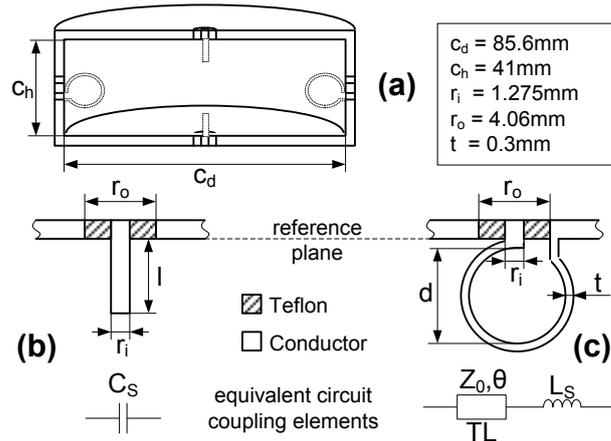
Mechanical dimensions of the cavity and coupling equivalent circuit elements.
